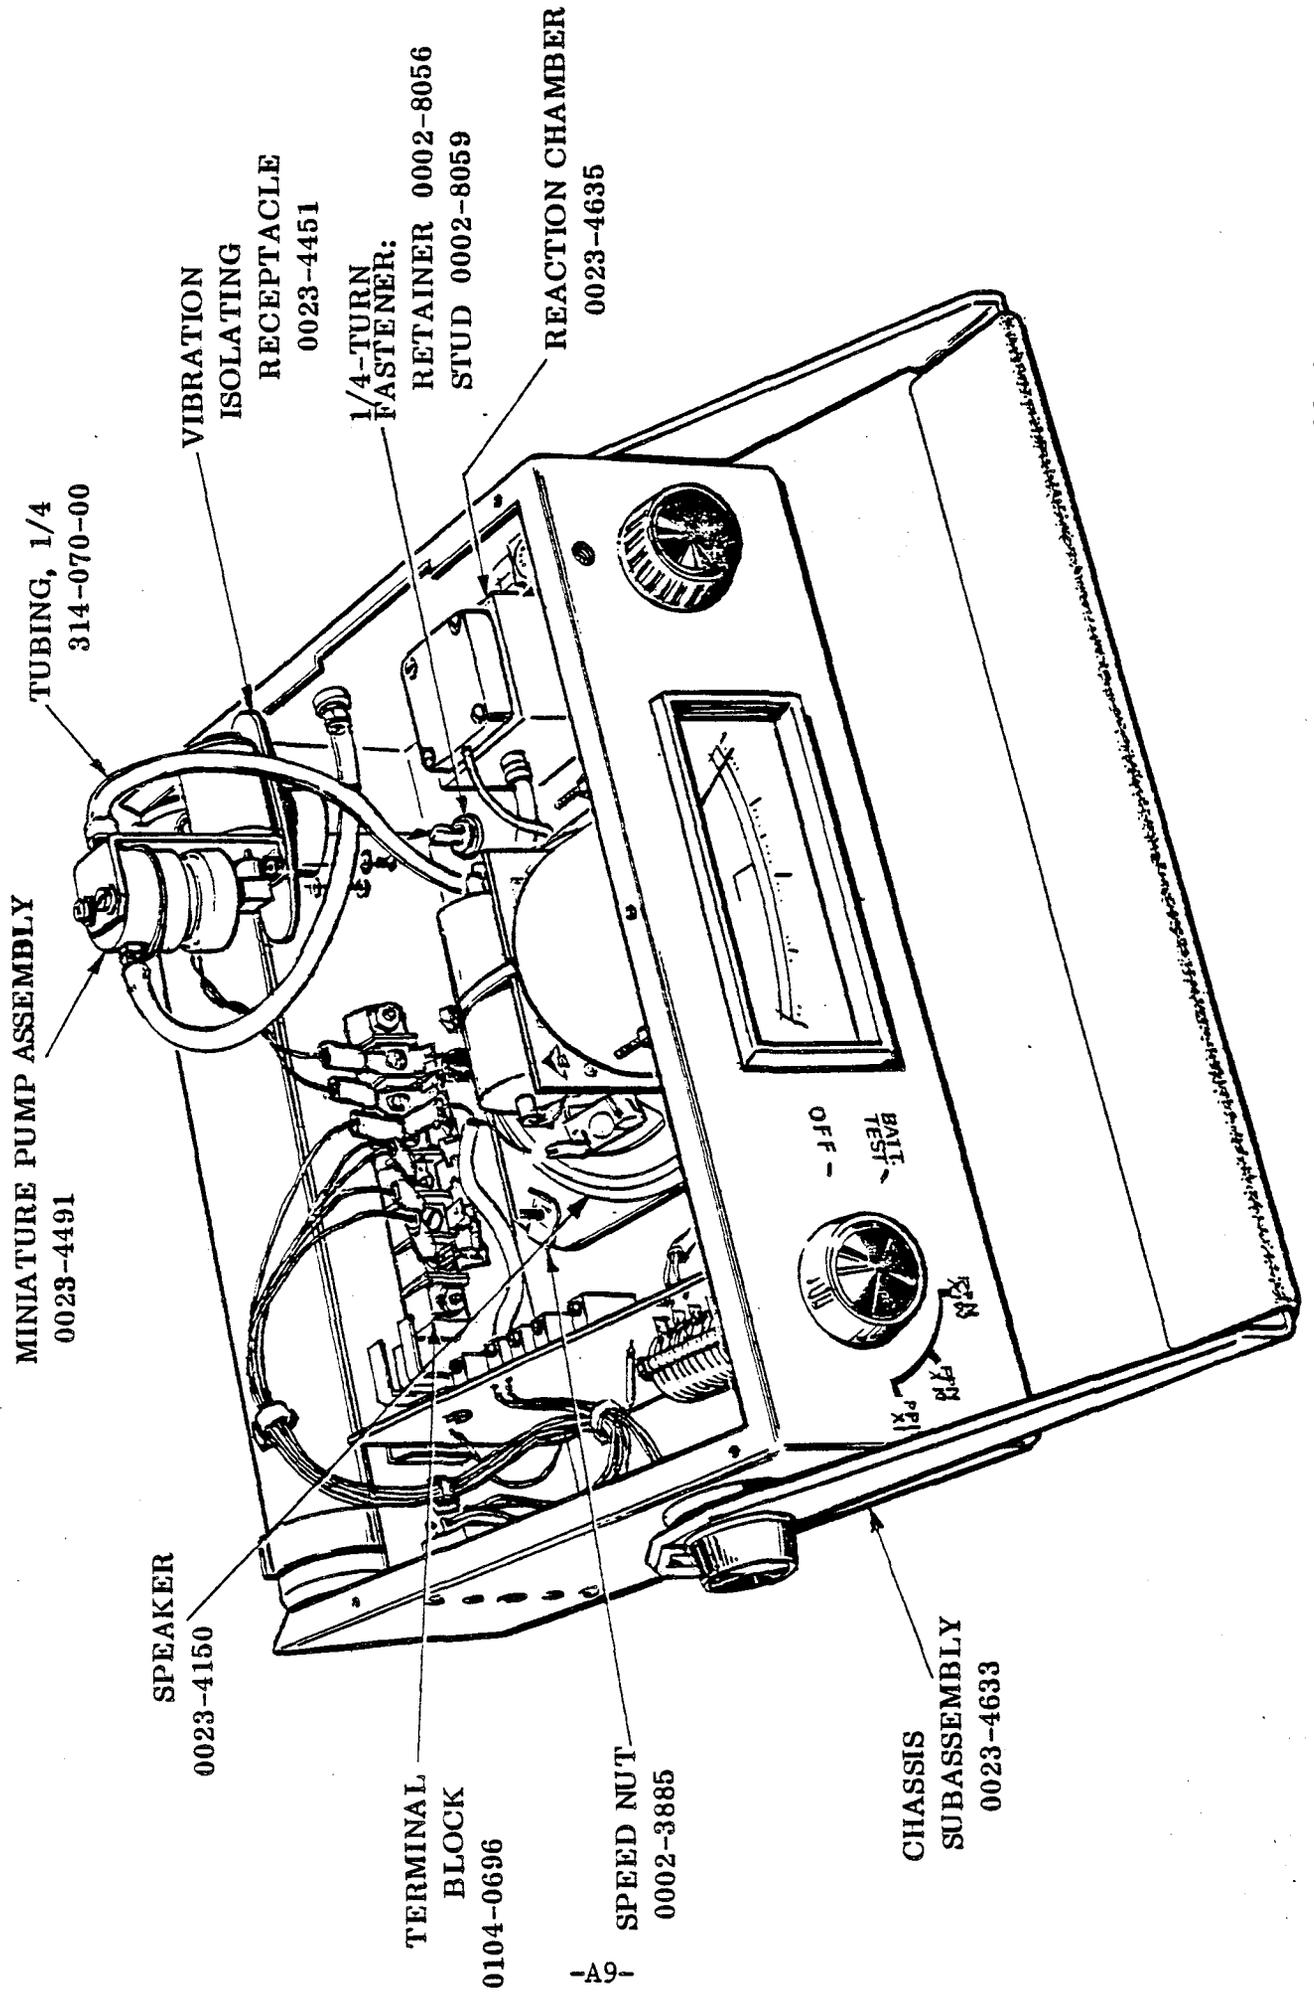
TLV Sniffer Chassis Subassembly Showing Miniature Pump Assembly in Disassembled Position
